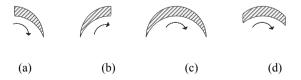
Chip thickness in different milling types: a. Climb milling (down milling); b. Conventional milling (up milling); c. Slotting (channel cutting); d. Centre cutting
